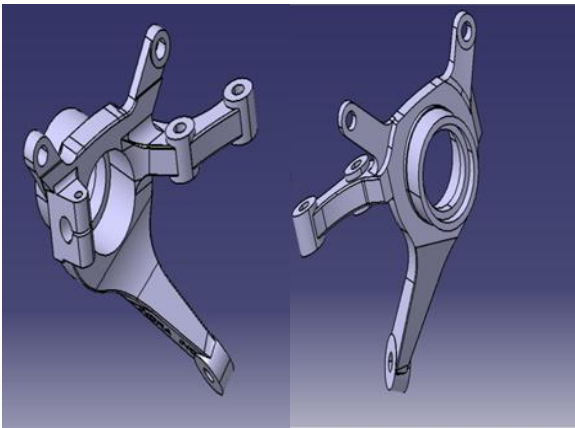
CAD model of simple steering knuckle in CATIA V5
